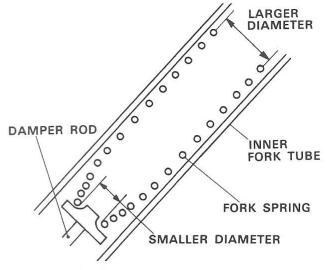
On YT 200 models, install the fork spring with the larger diameter end at the top (Sec 5)
